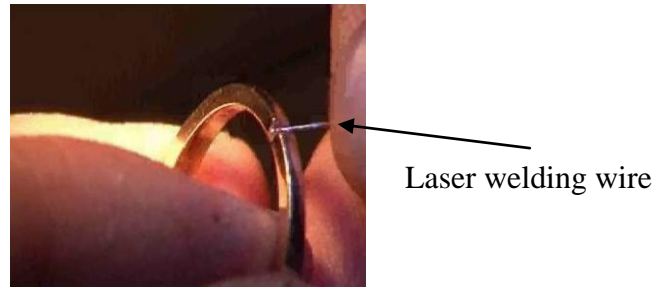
Implementing the laser welding wire in laser welding.
